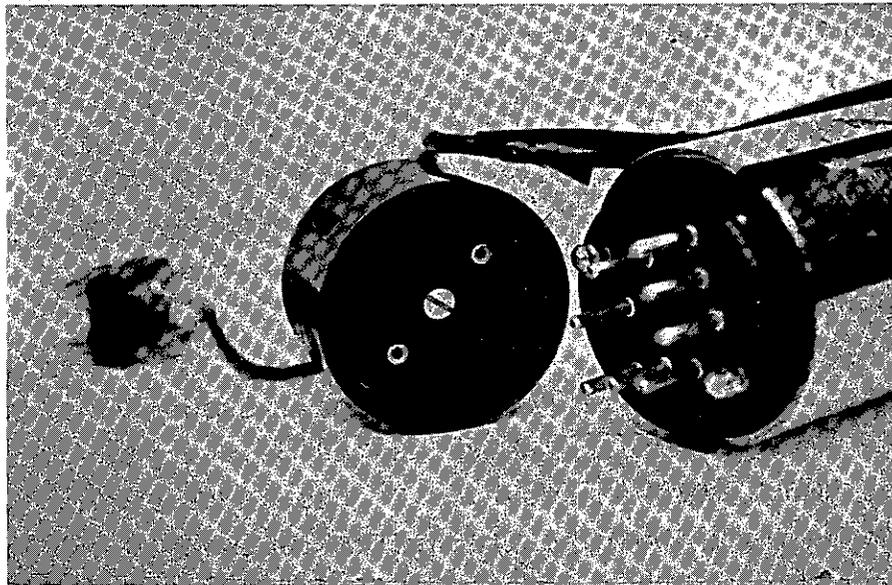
Black metal cap and wiring bundle removed from lower end of servo-motor.
